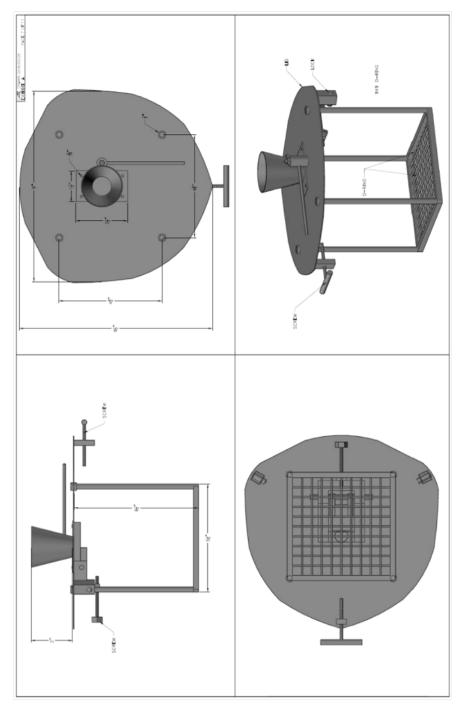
(2 of 2) Drawings of the Testing Device (All Dimensions in Inches)
